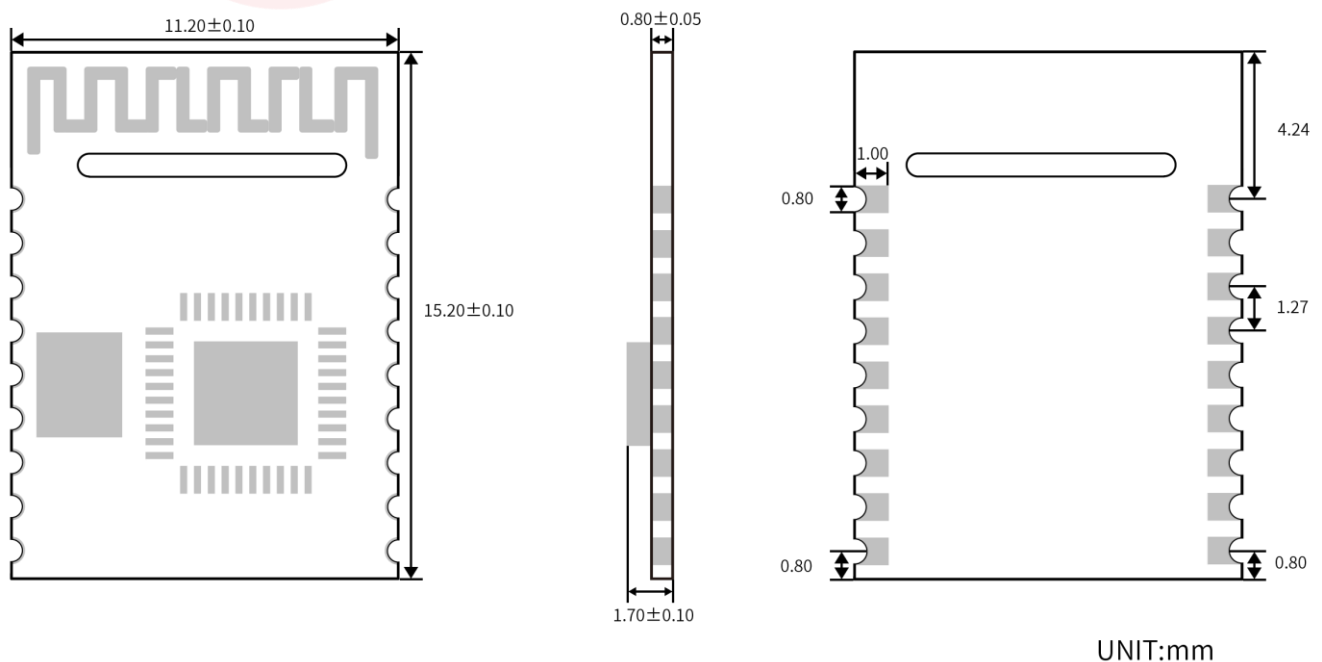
Recommended PCB Footprint of RSBRS02ABR-01 (mm)
